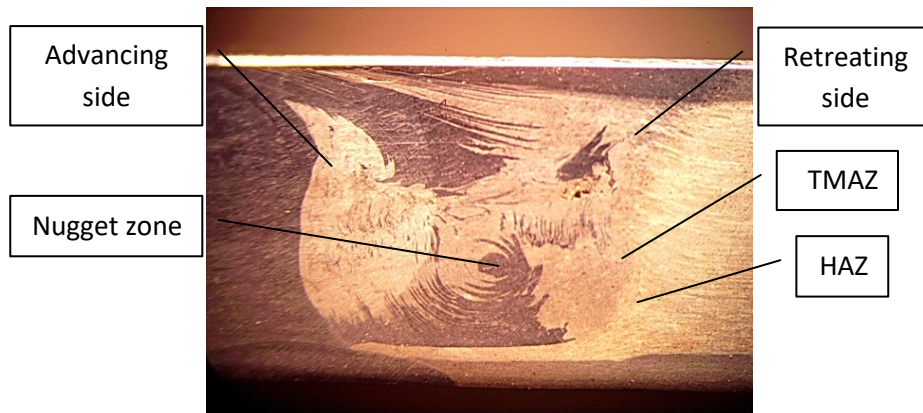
Macrograph of cross section of welded sample (B3).
